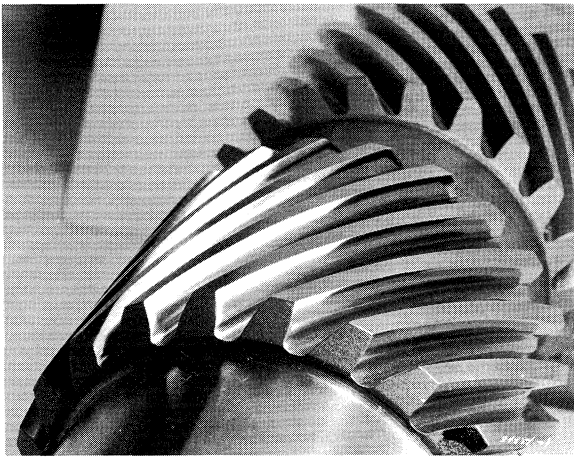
Close-up view of 2 to 4-mu surface finish on the honed herringbone pinion that mates with gear in Fig. 6-64.
